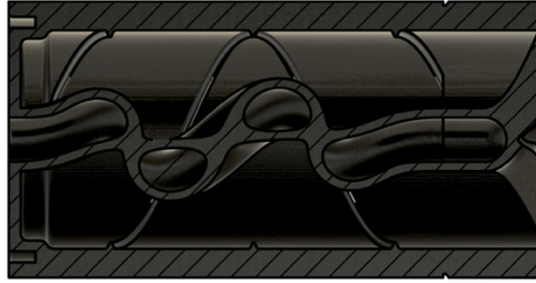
CAD Model of Short Configuration Fuel Grain Mold
